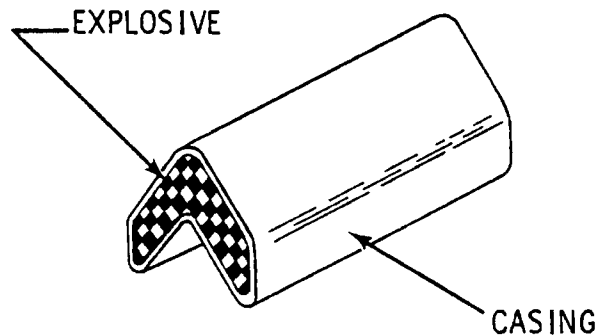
Section of Linear-Shaped Explosive Charge
